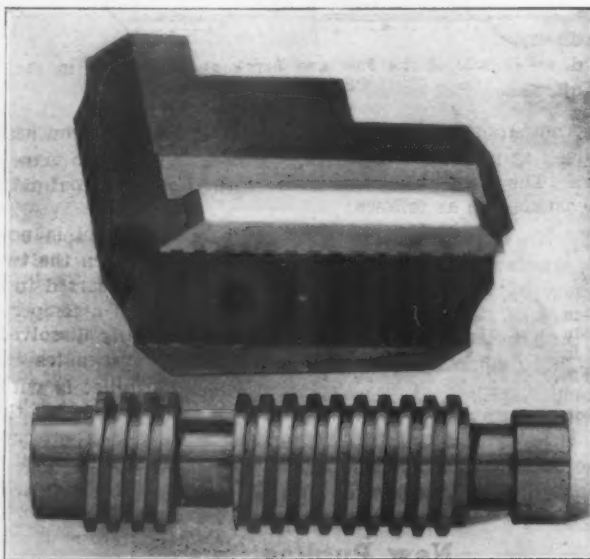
A Jaw and Screw of a 15-In. Chuck.
